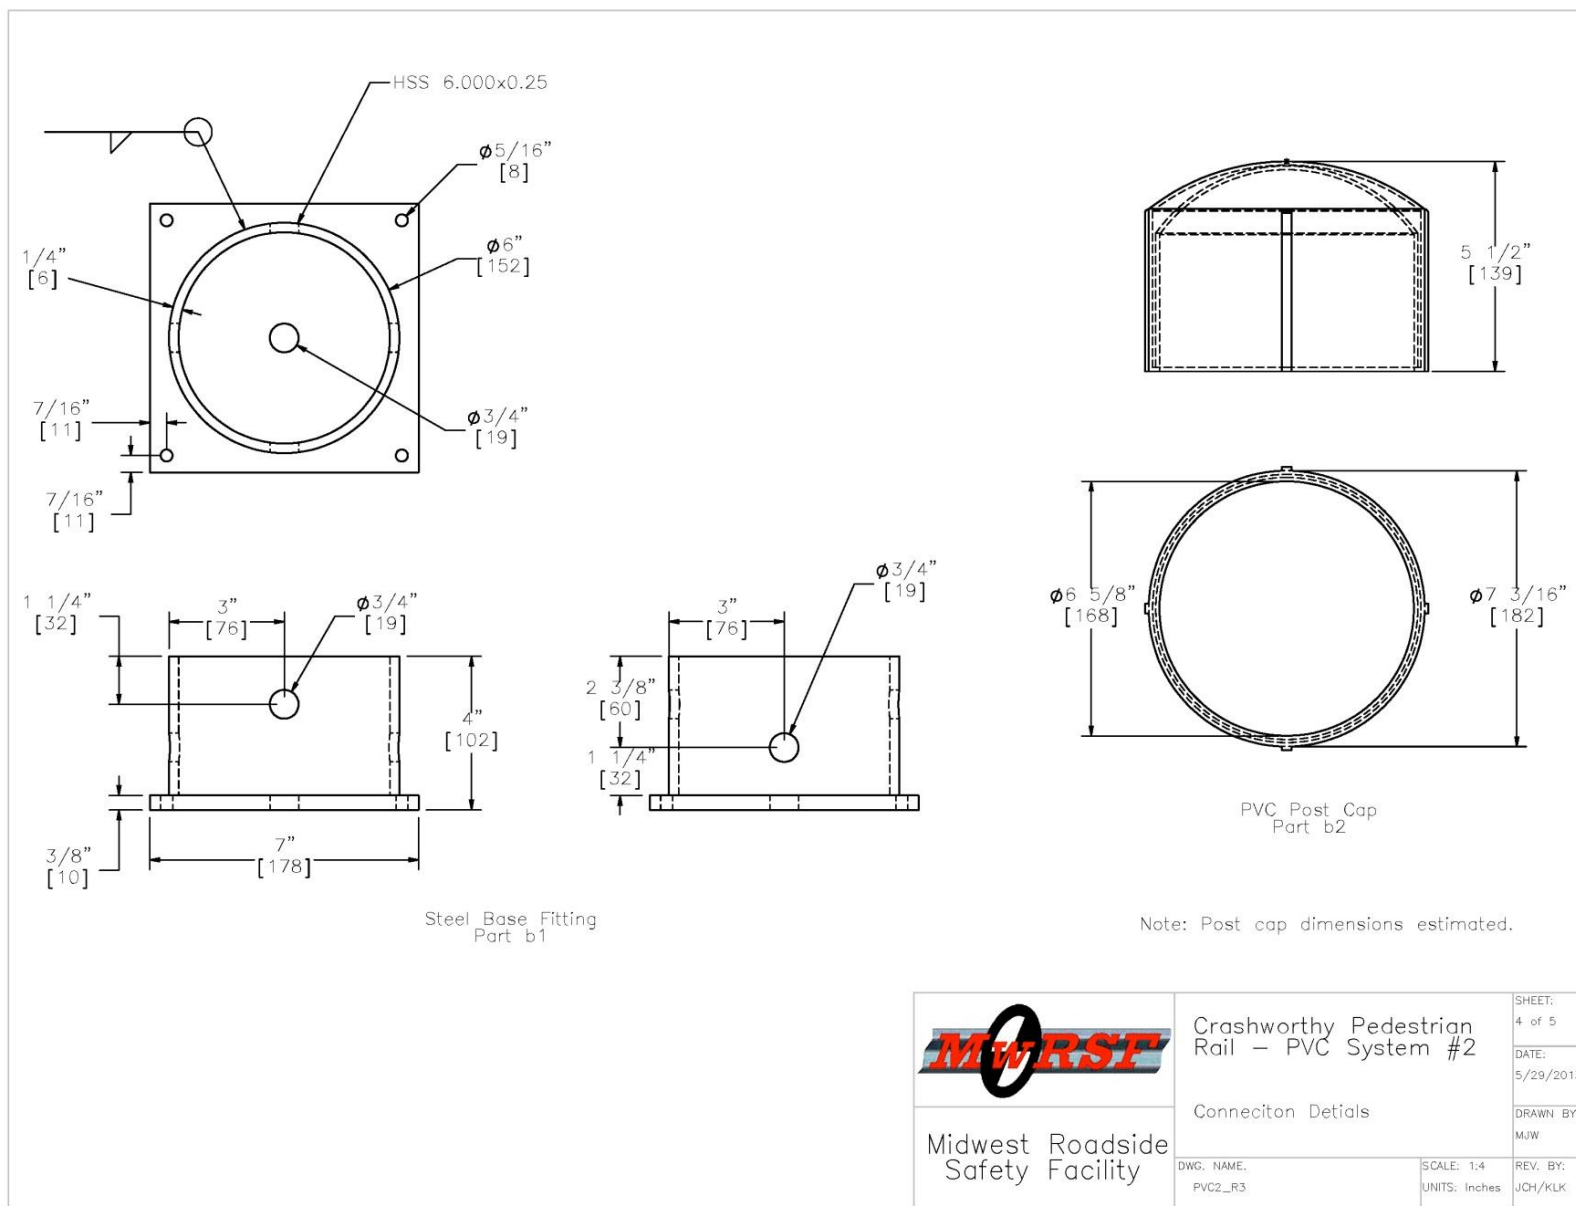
Modular PVC Rail, Design Concept PVC2-b (Sheet 4 of 5)
